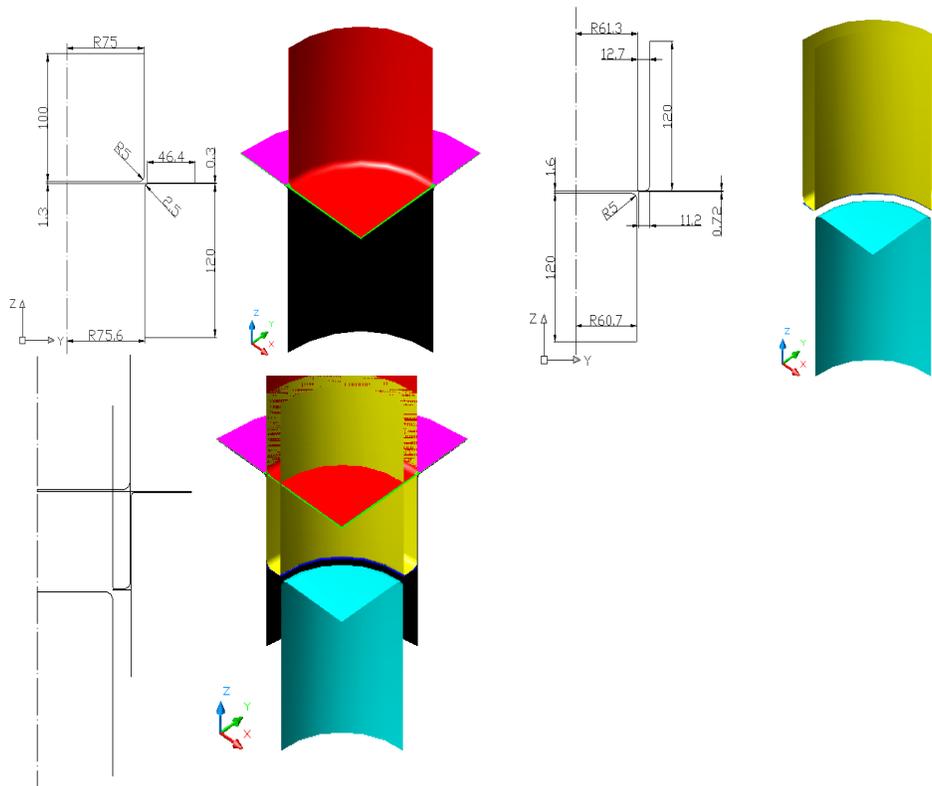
Dimensions of dies for first and second steps and schematic drawing of process
